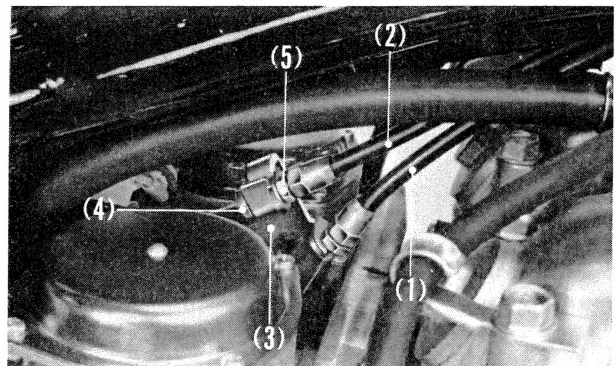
(1) "Closed" side cable (4) Lock nut
